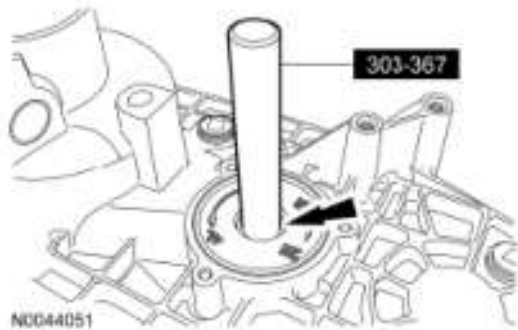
Installing Oil Seal Using Valve Stem Oil Seal Installer
